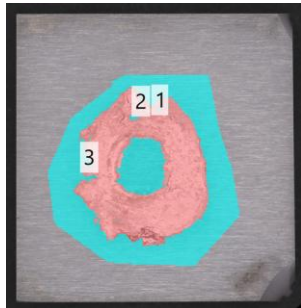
Fracture surface of ZrO₂ (条件)
